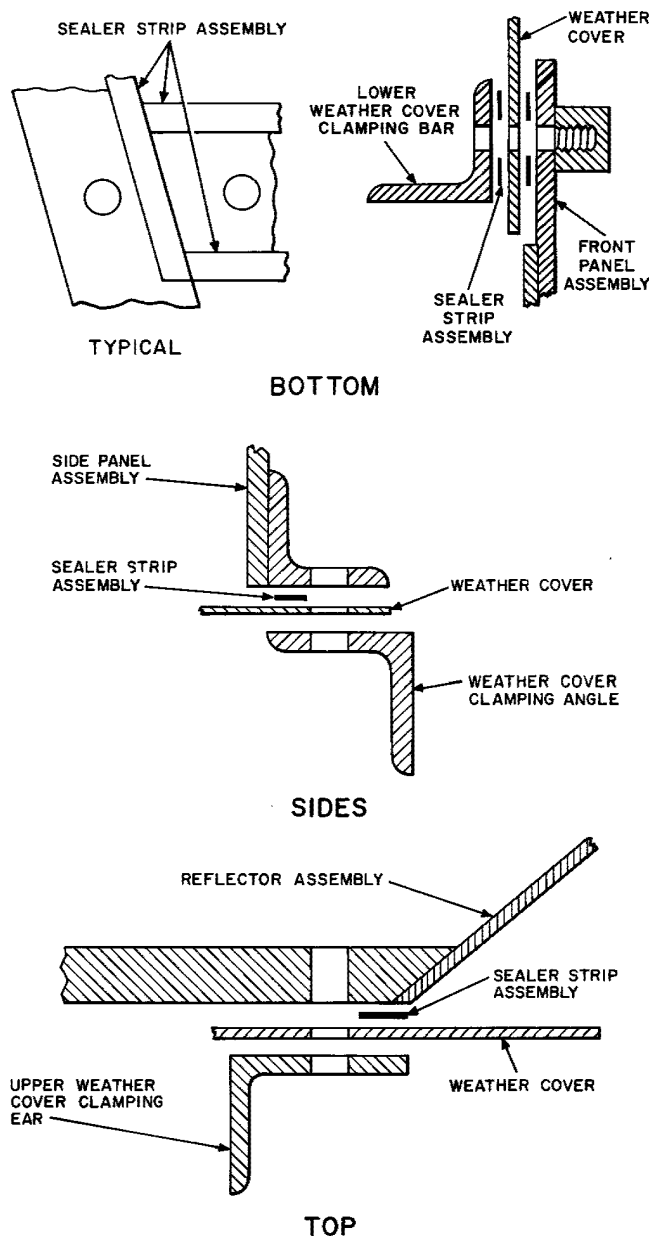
Location of Sealer Strip Assembly for Weather Cover
